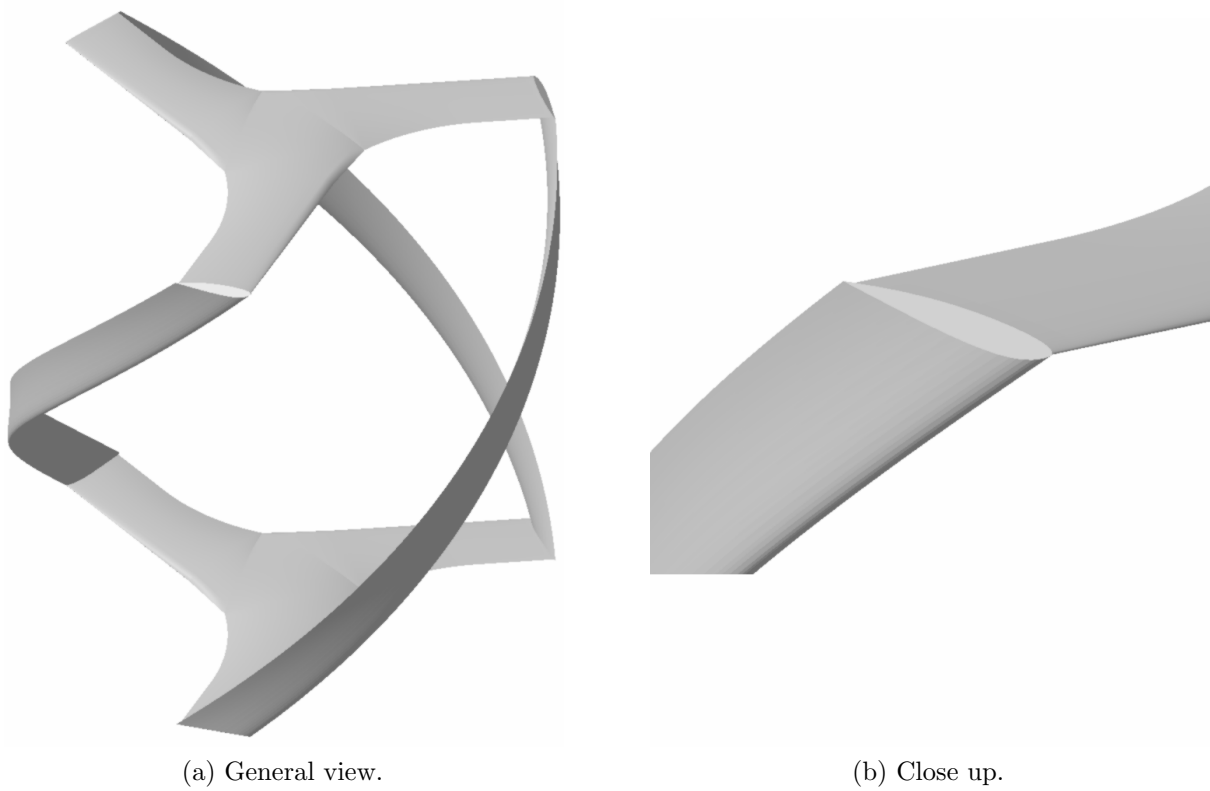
Blade–Tripod interface. Design with a chamfered edge.
